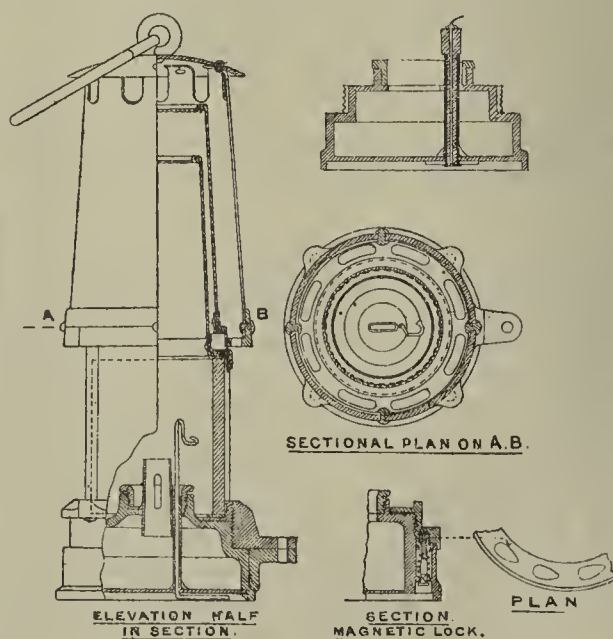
THE "J.M.S." No. 1 LAMP.
